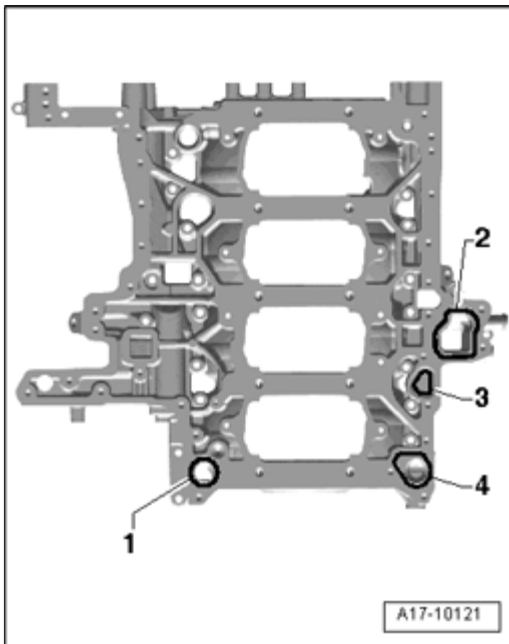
Inserting New Seals Into Grooves On Cylinder Block
